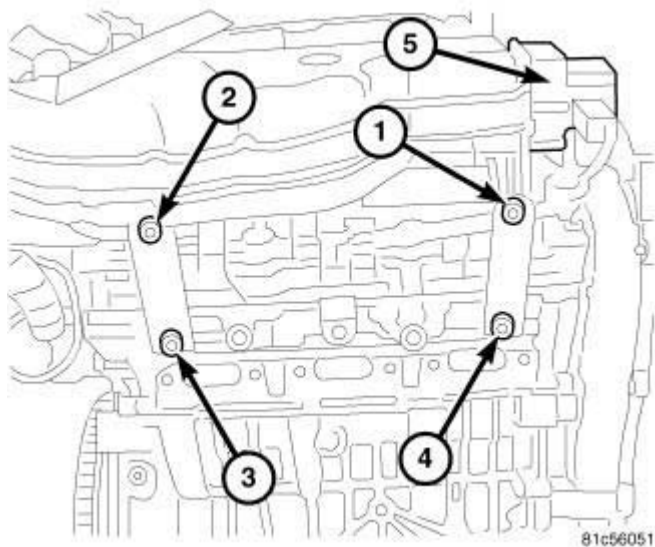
Manifold Tuning Valve, Short Runner Valve, Throttle Position Sensor & Manifold Absolute Pressure
